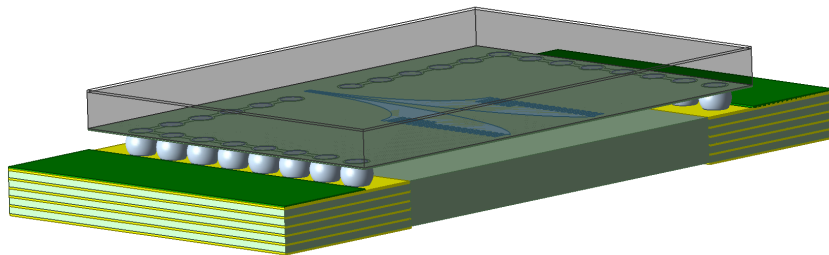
Layout view of the PCB, showing signal lines and package pad geometry.
